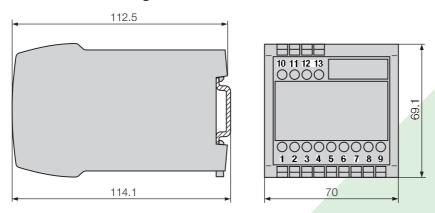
SINEAX I552 in housing P13/70 clipped onto a top-hat rail (35×15 mm or 35×7.5 mm, acc. to EN 50 022).
